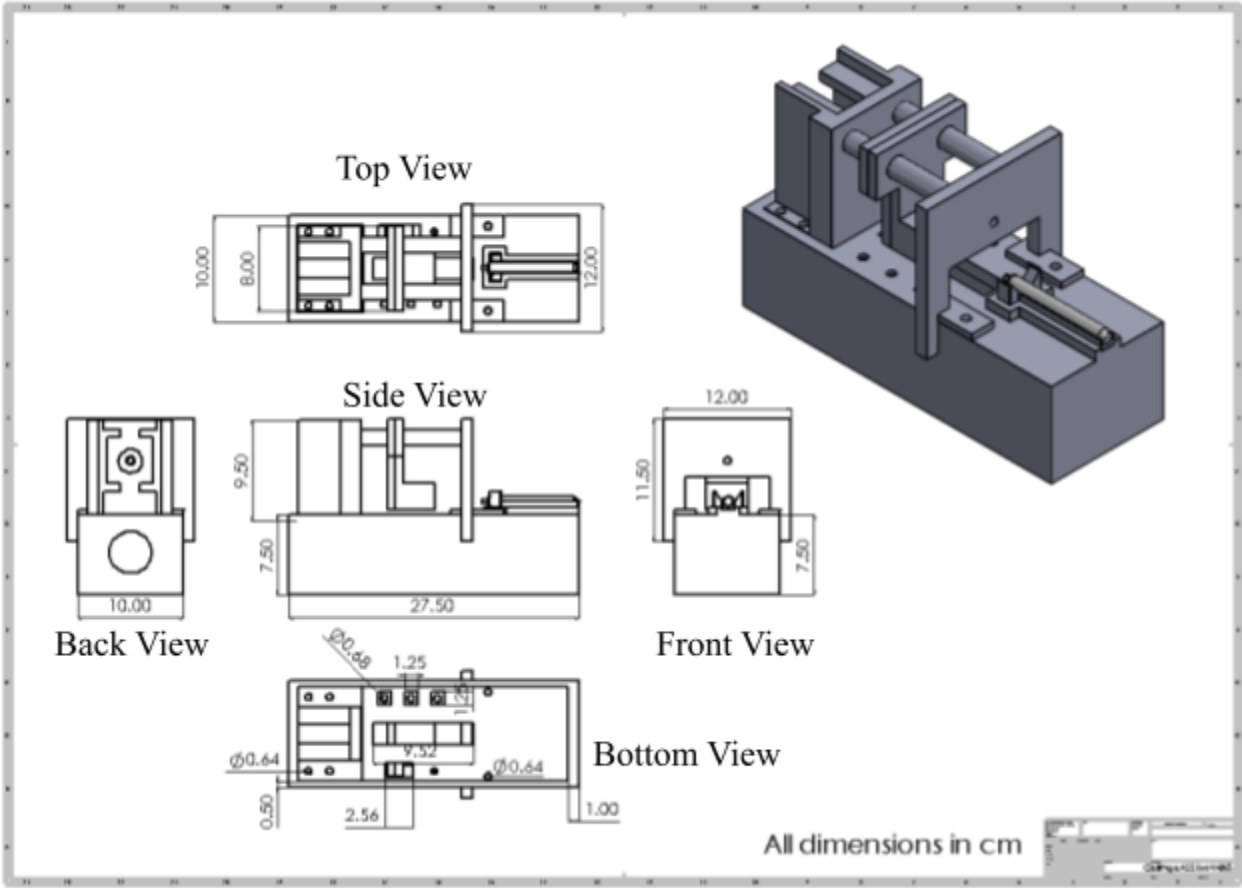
SolidWorks dimensions and reference drawings of the entire assembly.
